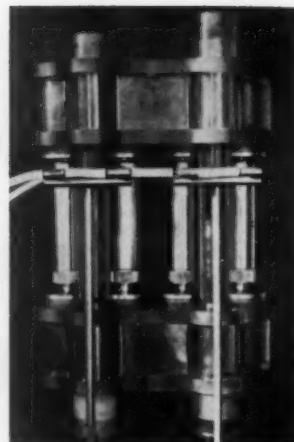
A photoelastic model of a small forging press was constructed to study the stresses in several threaded-connection designs, and secondarily to investigate the crossheads. The cylinders in the crossheads were machined to the scaled-prototype dimensions.
